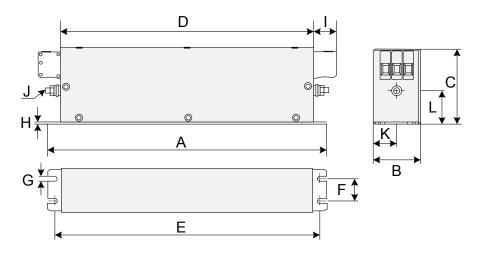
Dimensions of FN3258 series filters (7-180 A) (unit: mm)
